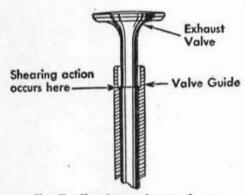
Showing undercut of exhaust valve on 1949-53 engines
